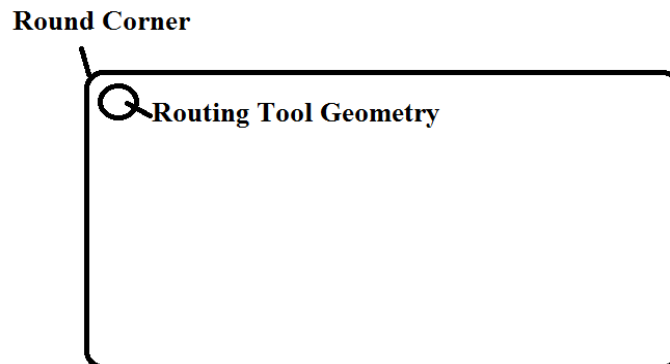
Annotated Routing Tool Path Geometry for Rectangular Pockets
